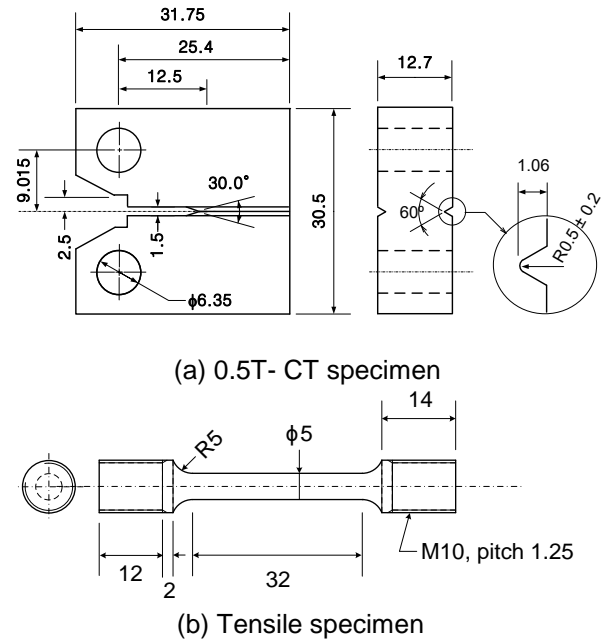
Specimens used for J-R fracture toughness and tensile tests
